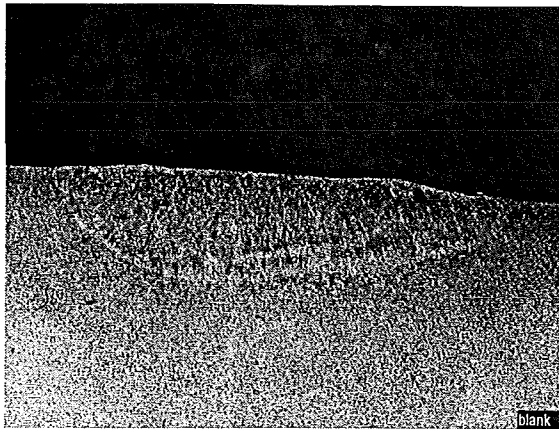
Transverse cross-section under standard welding conditions.
